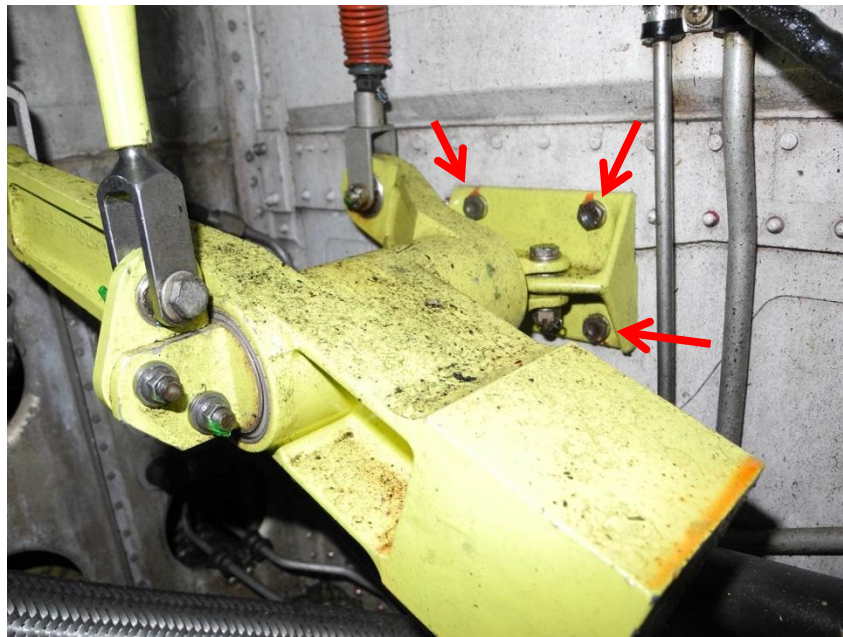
An overall view of the collective torque tube assembly. The red arrows point at three of the four bolts securing the support bracket to the airframe (fourth bolt is not visible in this photo).
